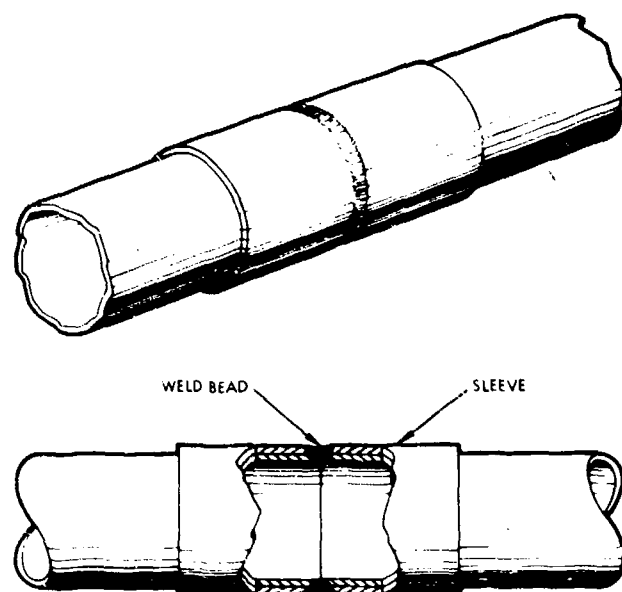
Welded Sleeve Joint
